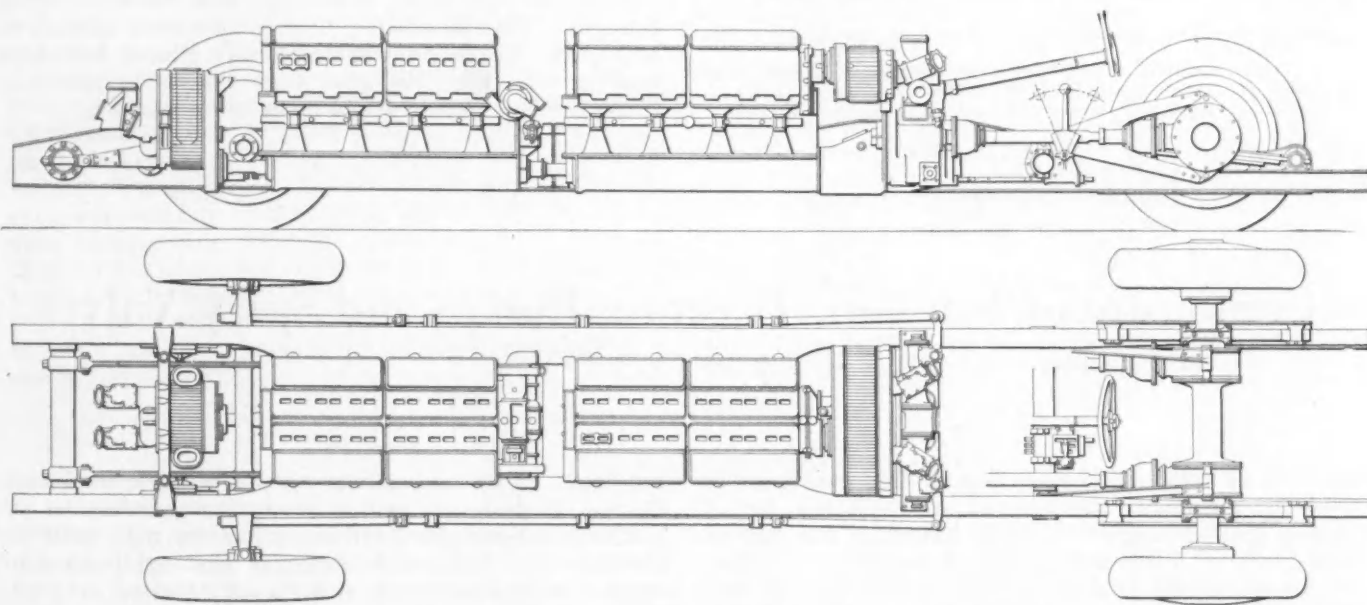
GENERAL ASSEMBLY OF THE SILVER BULLET RACING CAR
